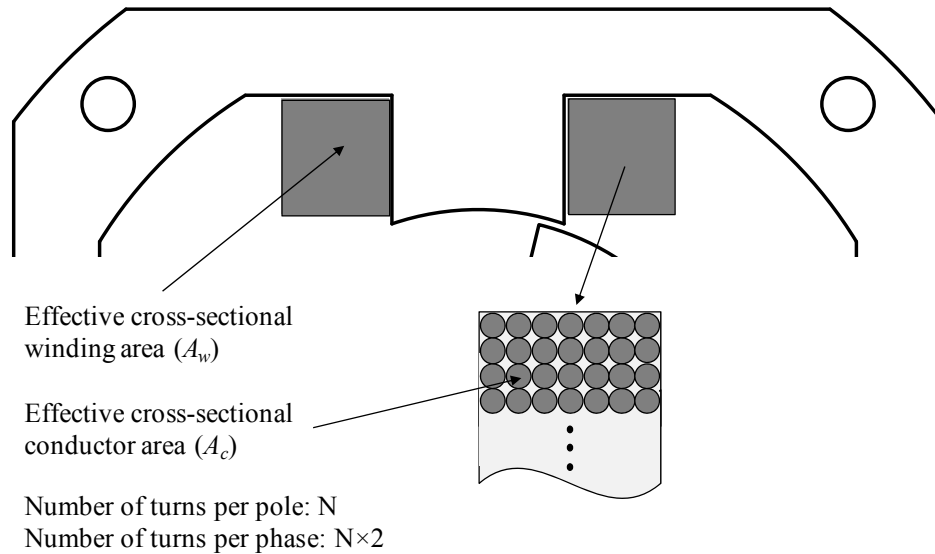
Cross-sectional view of a winding mounted on a stator pole
